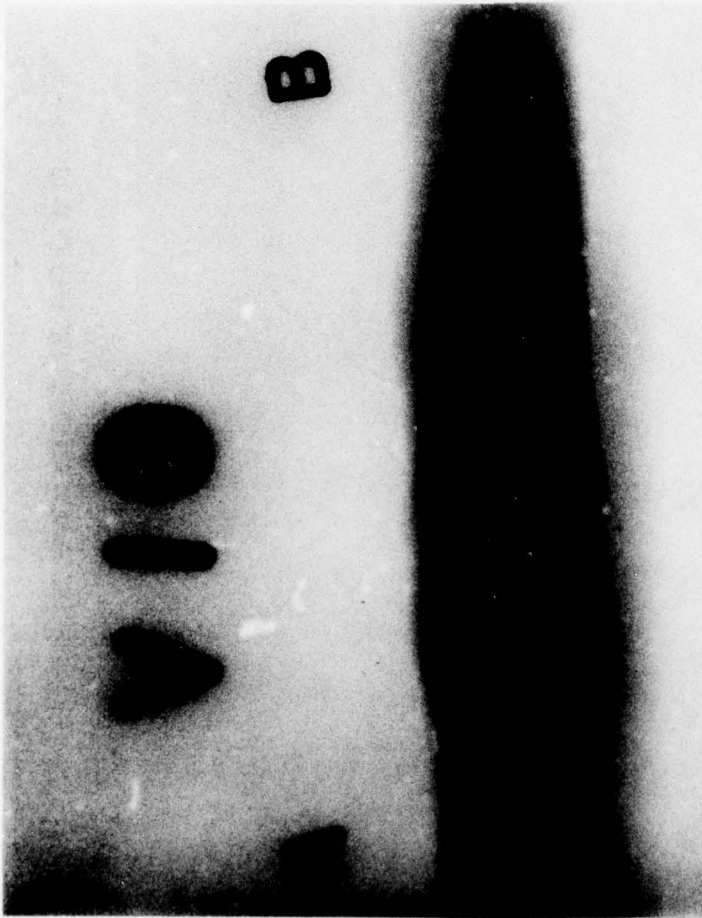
RADIOGRAPH OF WELD V-10
